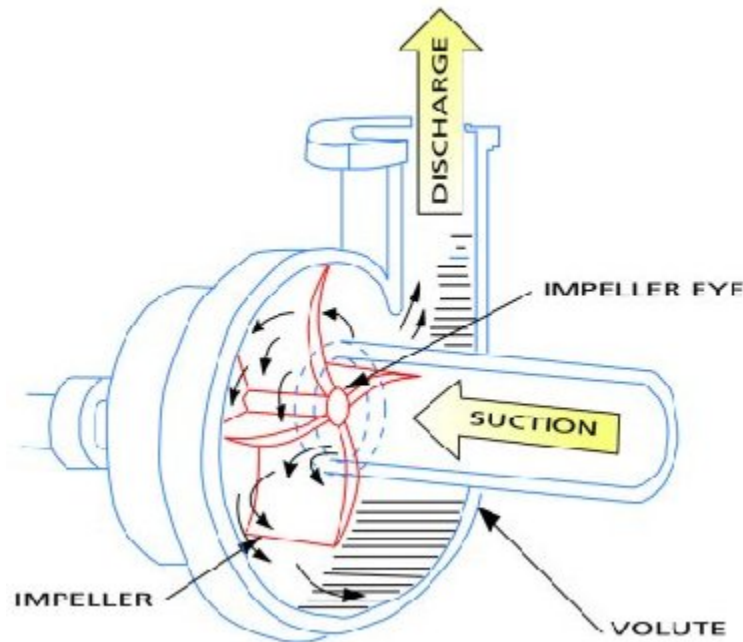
Flow of Fluid in a Centrifugal Pump
